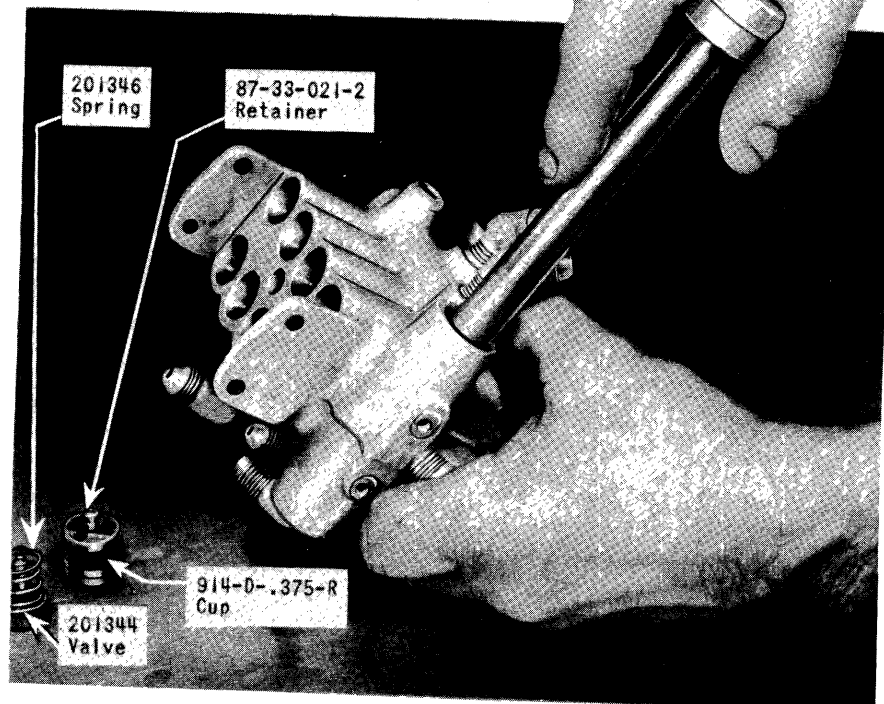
Removing Retainers and Valves - Inlet Port of Valve Body
